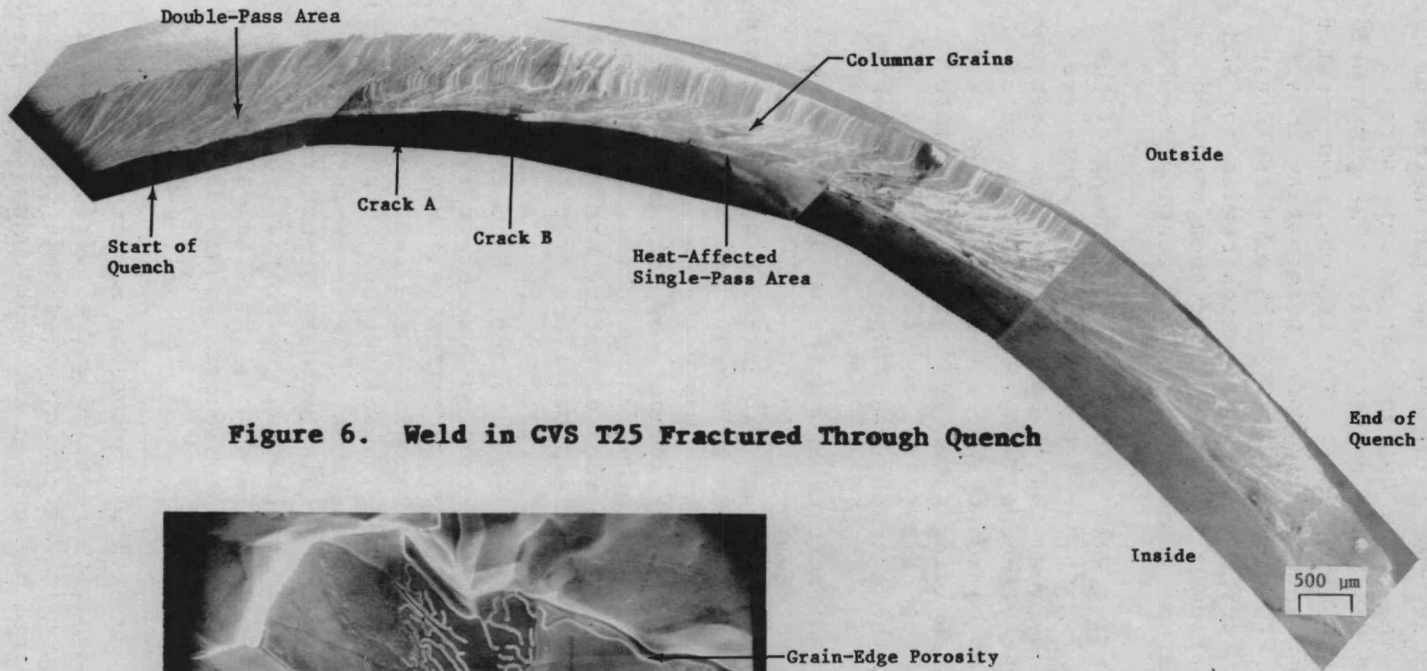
Weld in CVS T25 Fractured Through Quench
